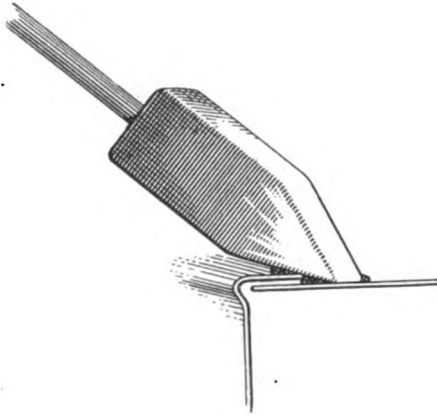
THE WRONG METHOD OF USING THE SOLDERING IRON
